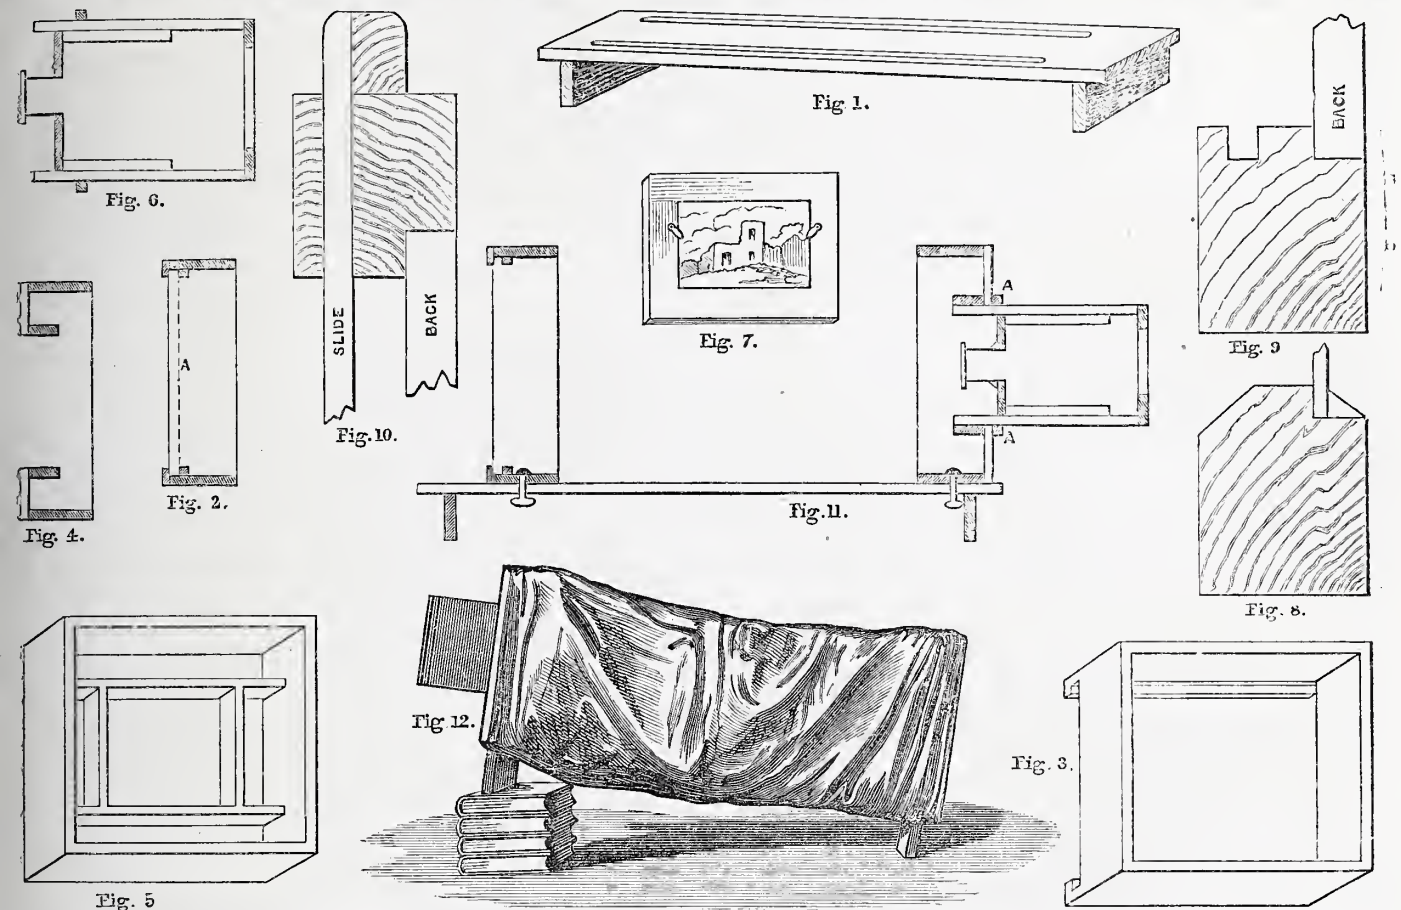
Baseboard, Perspective View, showing Elevation also. Fig. 2.—Camera Back: Section. Fig. 3.—Ditto: Elevation. Fig. 4.—Camera Front: Section. Fig. 5.—Interior of ditto: Elevation. Fig. 6.—Sliding Box for Front of Camera: Section. Fig. 7.—Carrier for Negative. Fig. 8.—Ground Glass Frame: Section. Fig. 9.—Dark Slide Framing: Section. Fig. 10.—Top End of Dark Slide. Fig. 11.—Camera Complete: Section. Fig. 12.—Camera in Position for Enlarging.
